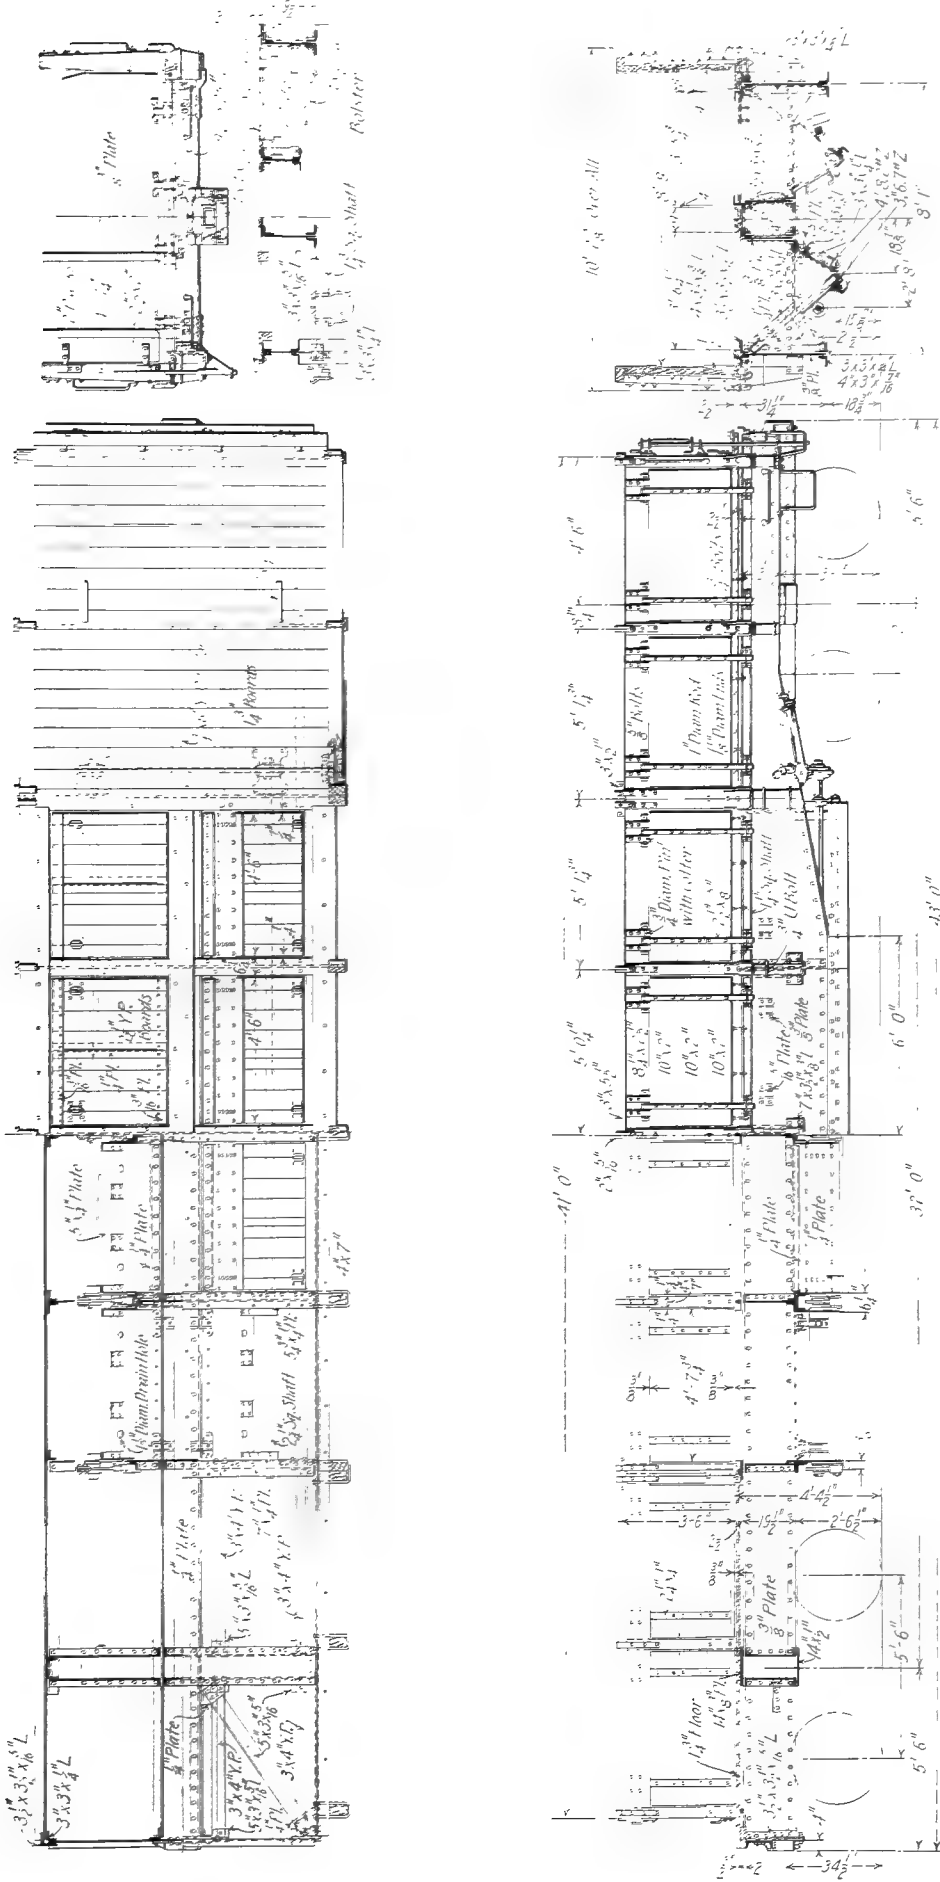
All-Steel 50-Ton Capacity Convertible Flow, Gondola or Ballast Car. Builder, Enterprise Railway Equipment Co.
